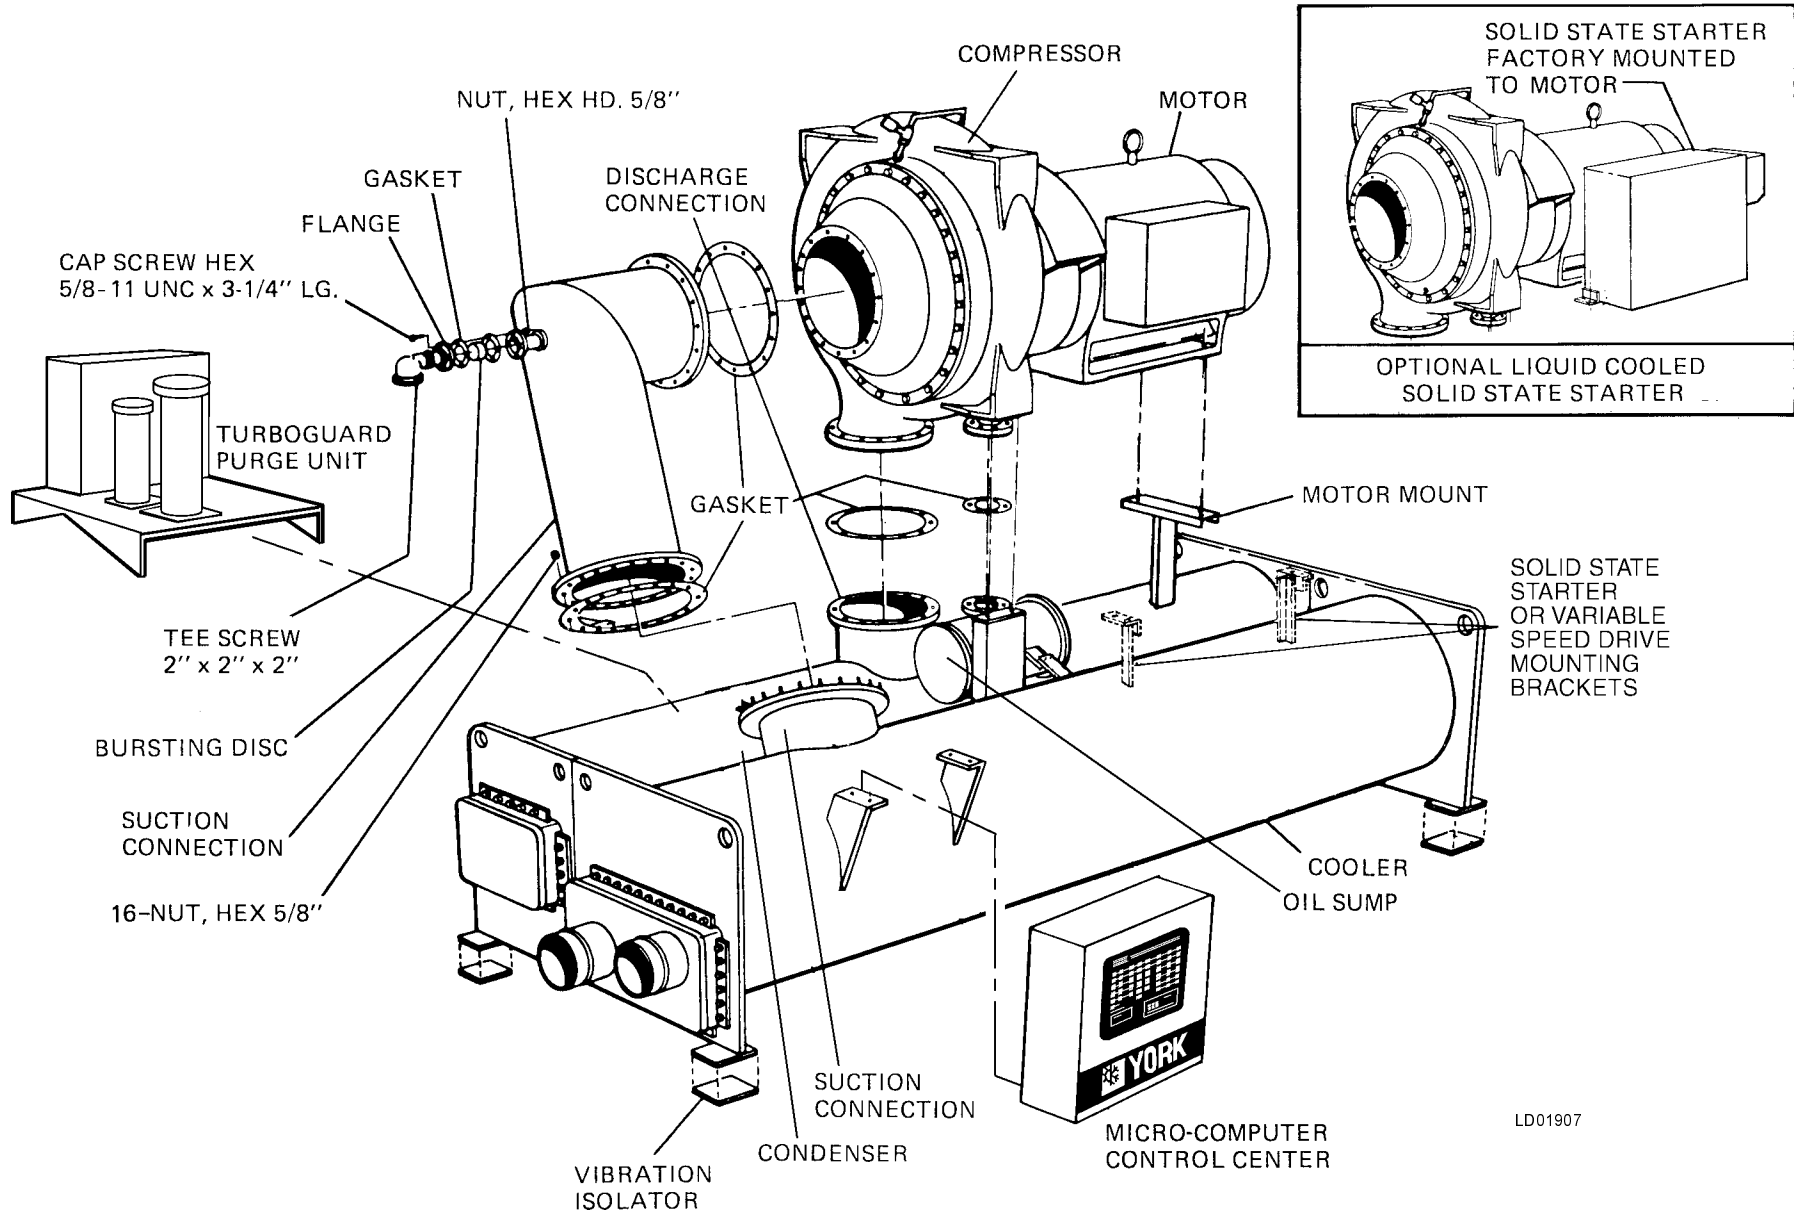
EXPLODED VIEW ASSEMBLY (B & C COMPRESSOR MODELS)
